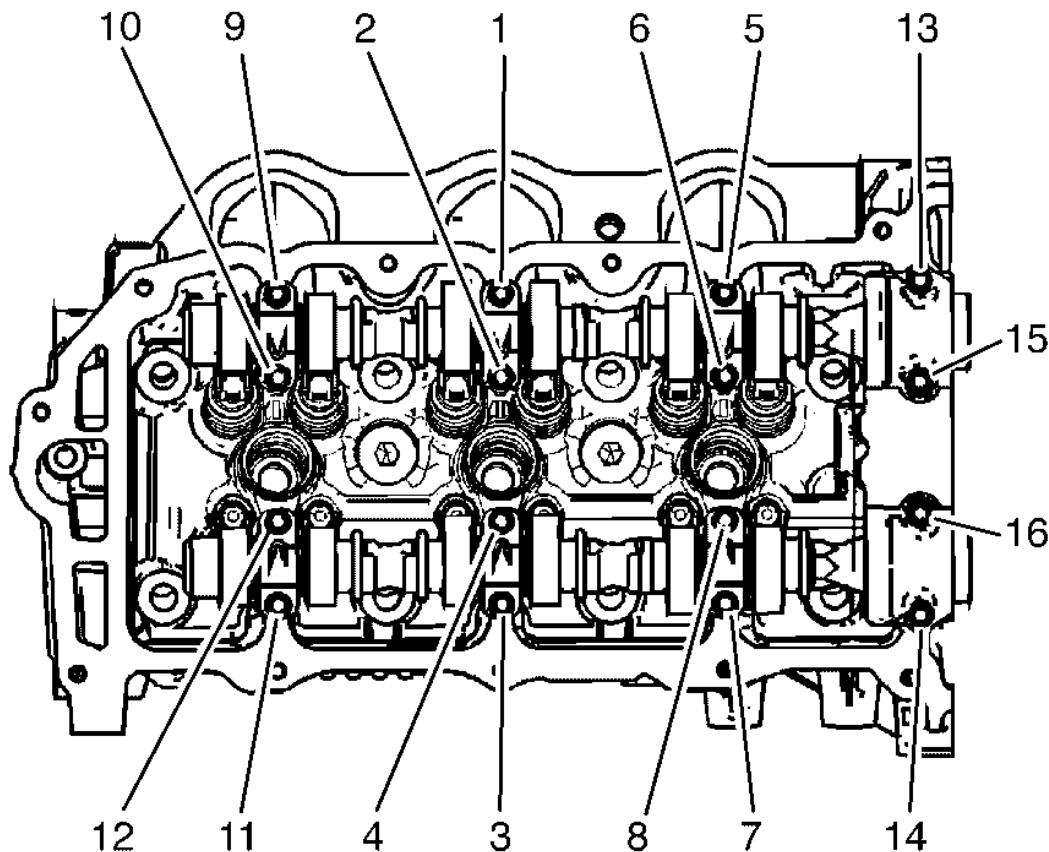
Locating Right Cylinder Head Camshaft Bearing Cap Markings
